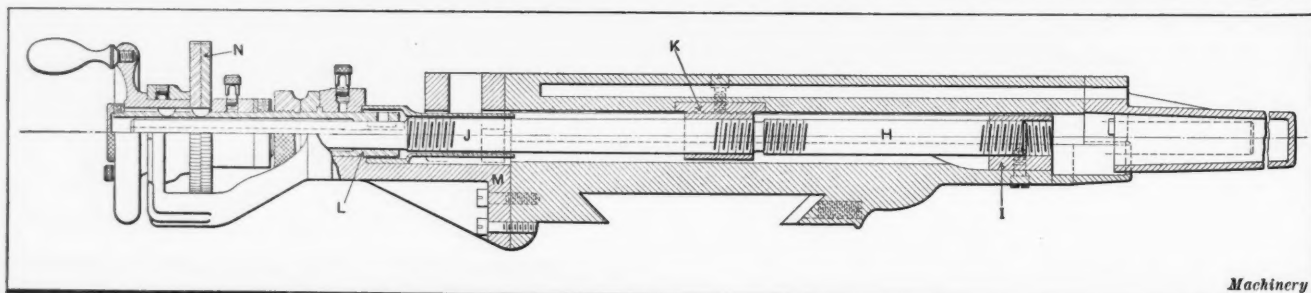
Cross-sectional View through Wheel-spindle Slide
